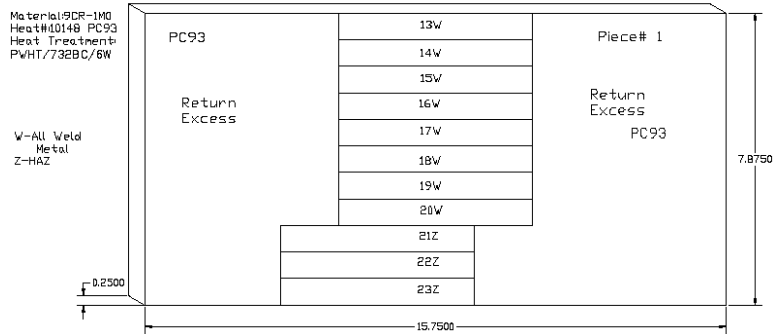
Typical Weld Metal and Weldment Specimen Cutting
